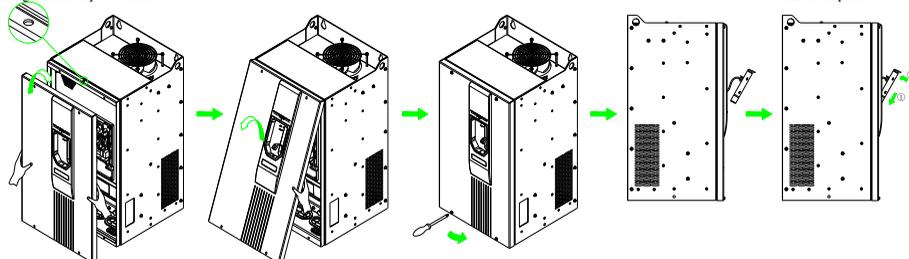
Steps for Disassembly and Installation of Cover Plate of Hope530G45T4~Hope530G375T4 Models
